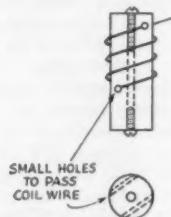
Sketch showing the slug tuned coil made from a piece of coax.
